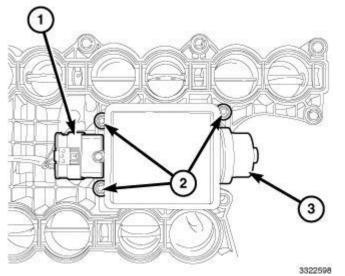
Swirl Valve Actuator, Connector & Fasteners Courtesy of CHRYSLER GROUP, LLC
